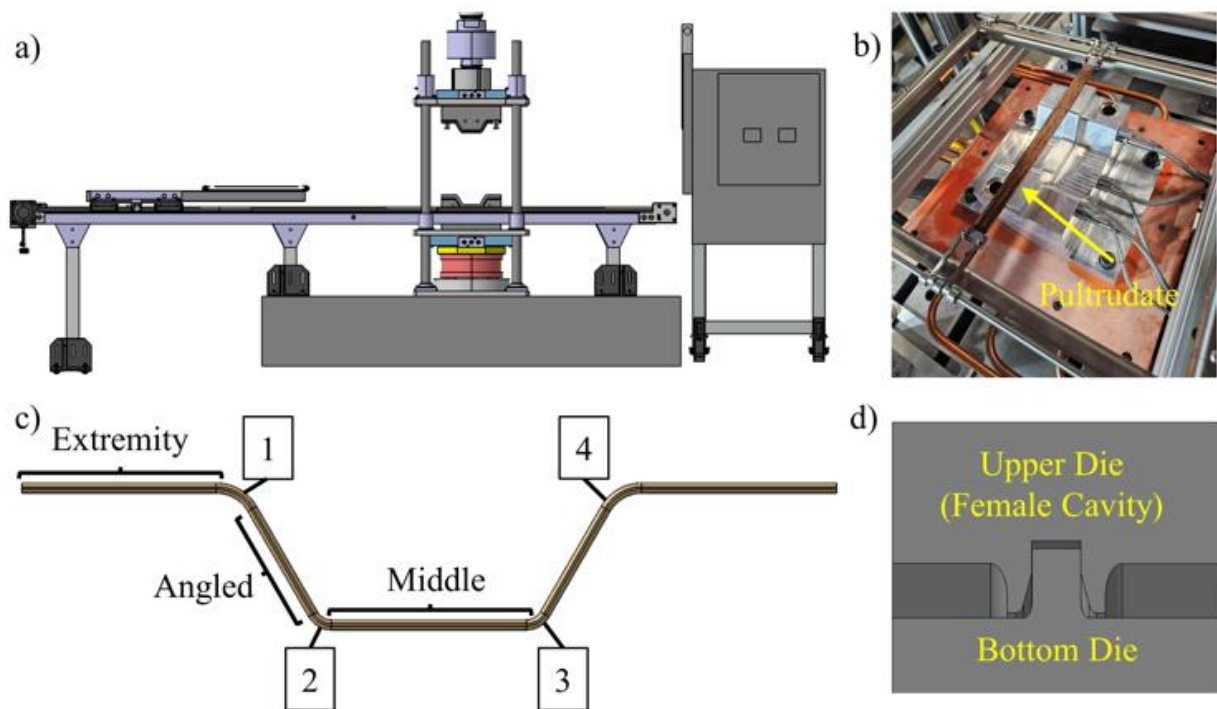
Stamp-forming apparatus: a) Stamp-forming equipment CAD (hydraulic press not shown); b) Close-up of the transfer system; c) Geometry of the stamp-formed pultrudate (with identified sections and angles); d) Close-up of the cross-section of the upper die.
